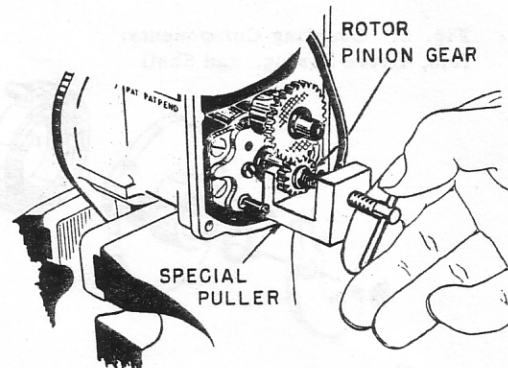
Use of OMT76 Magnetic Rotor Gear Puller
